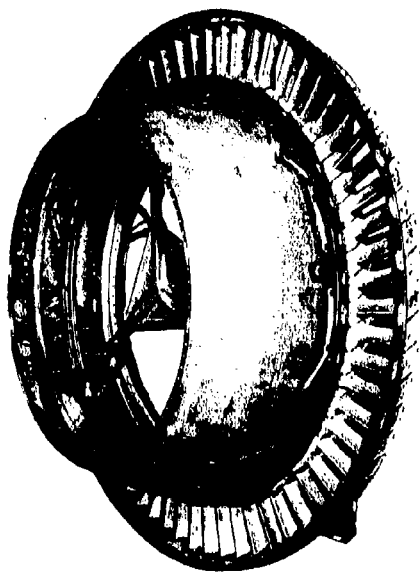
STAGE ONE TURBINE NOZZLE ASSEMBLY - Photograph of the GE4/J5 stage one turbine stator assembly prior to initial development engine testing.
